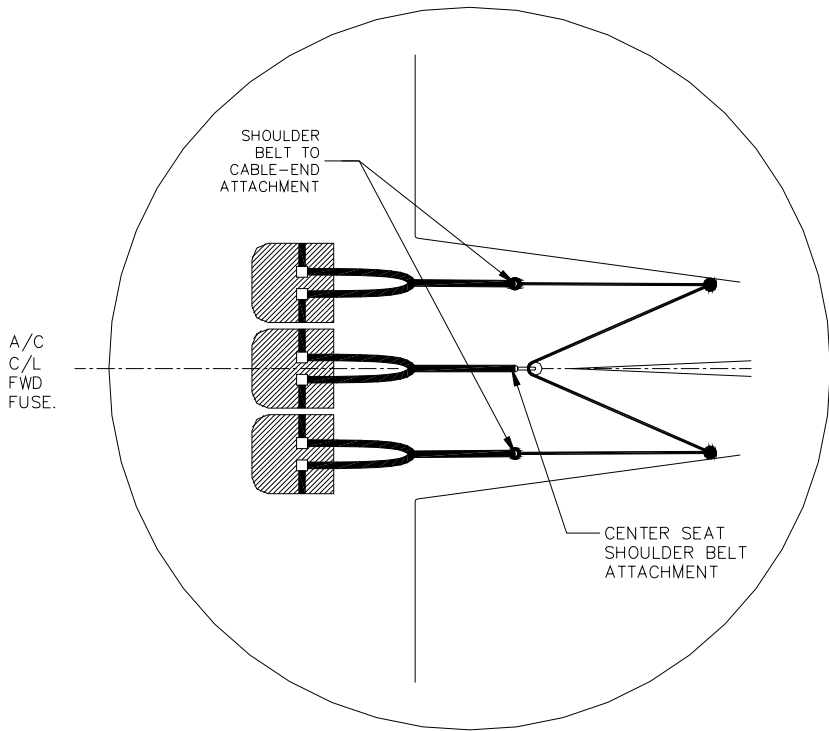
Shoulder Harness Attachment Arrangement - Top View
